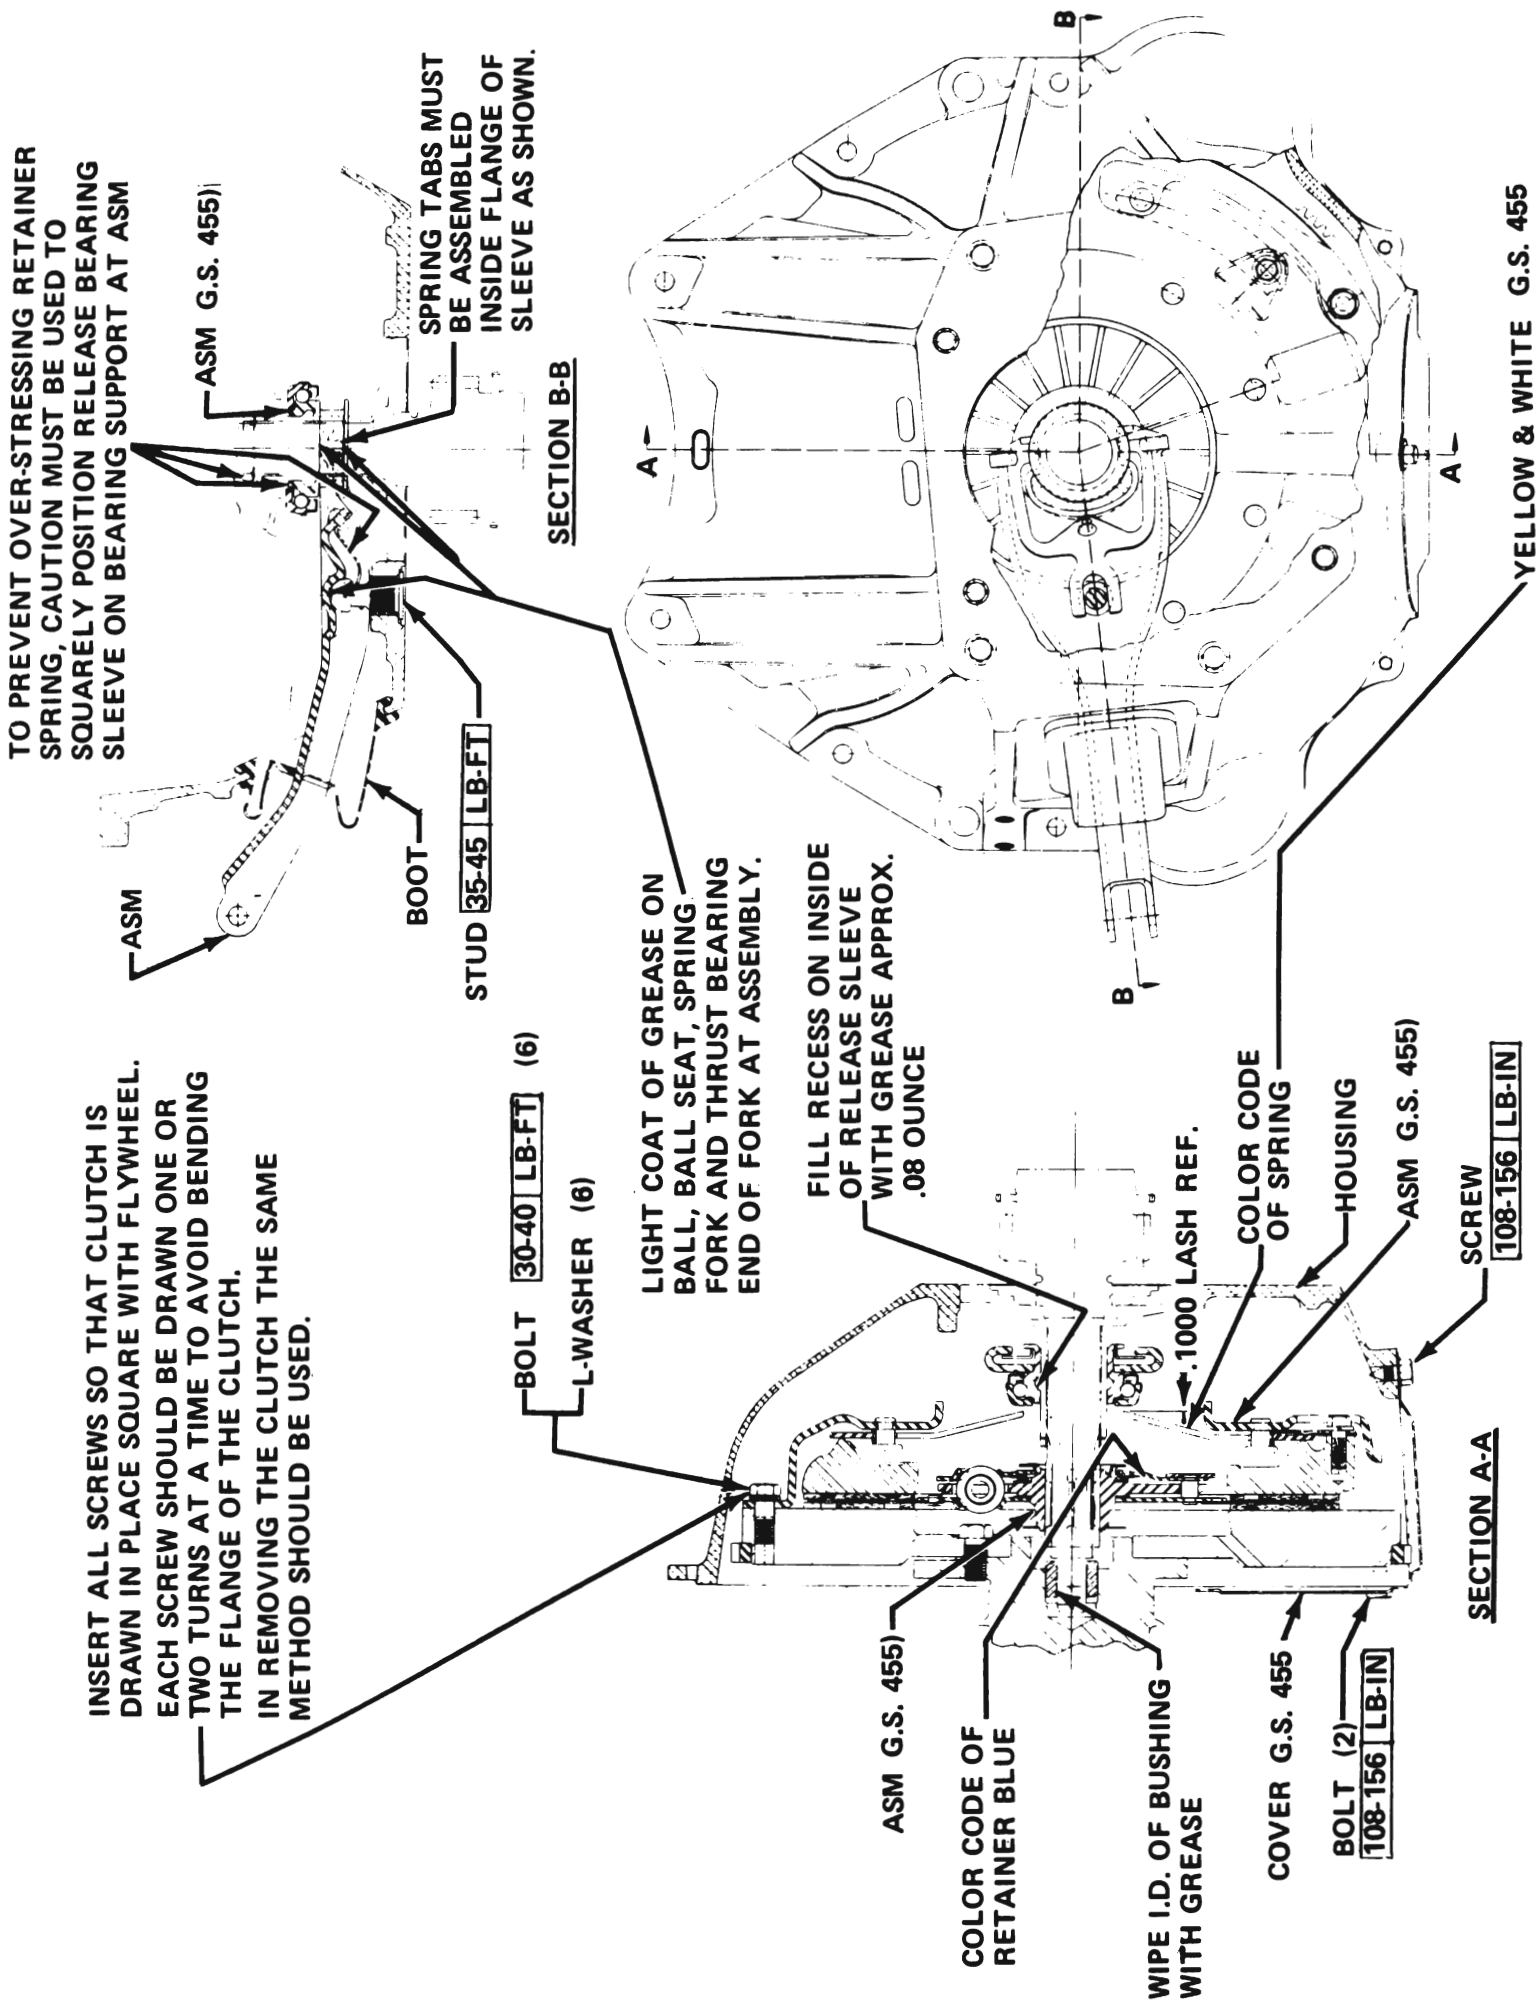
A-6 Clutch Inner Controls - 455 Cu. In. Engine With G.S. Option
